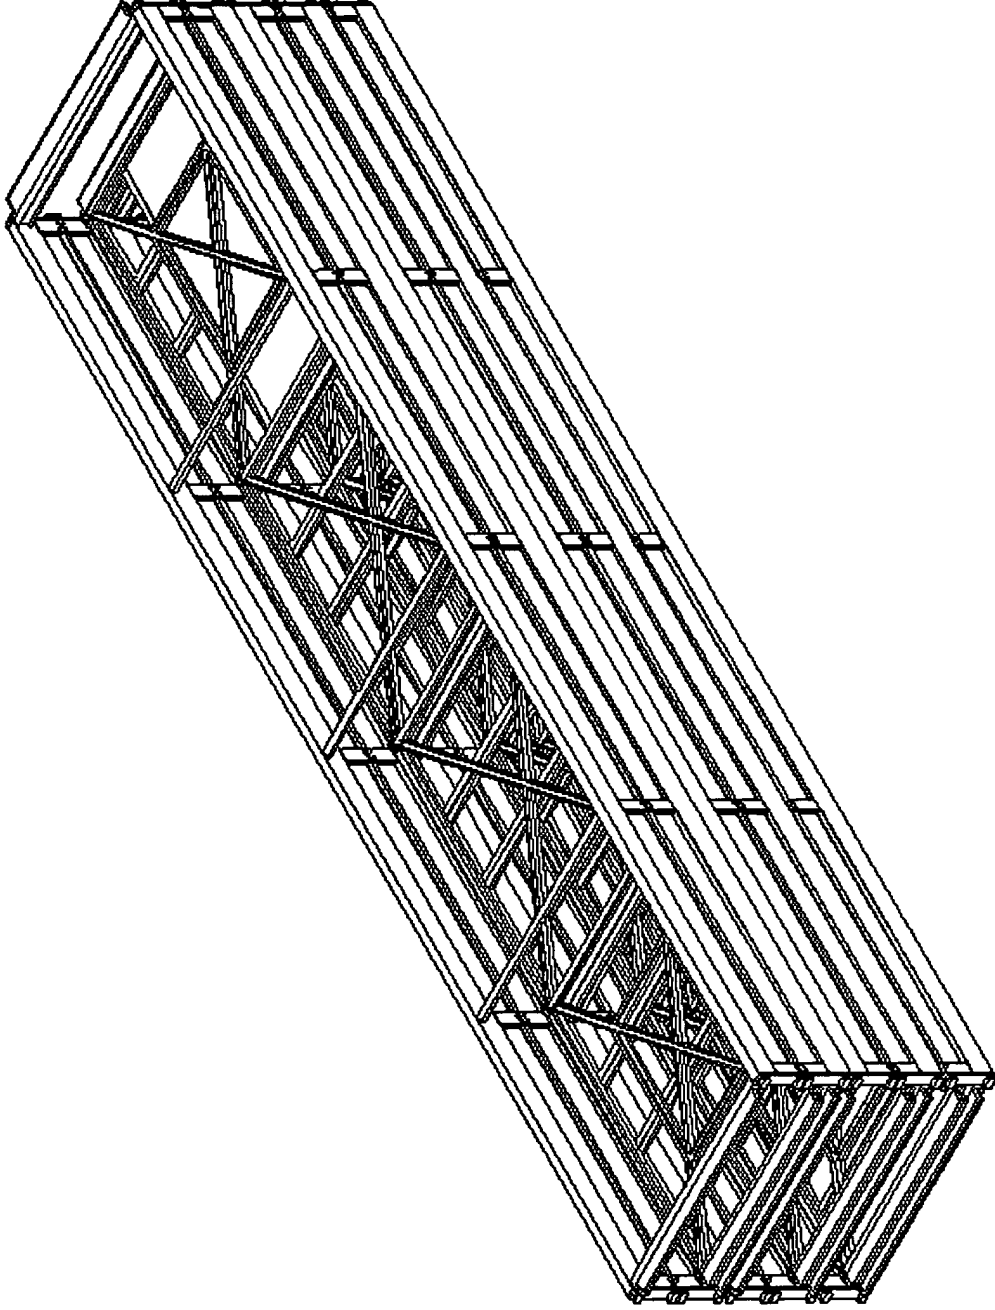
B: Step3 of disassemble and load process: The second "collapsible cargo container frame panel assembly" is stacked on top of previous assembly.
